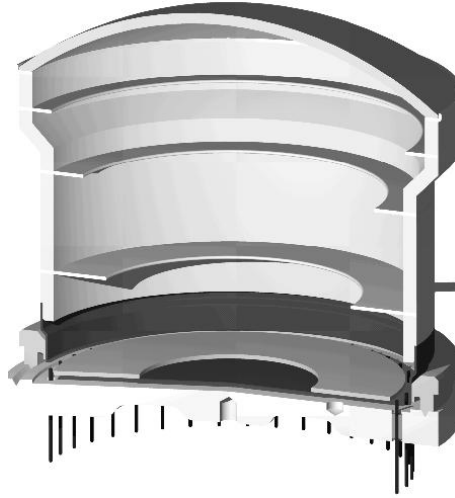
3D drawing of the ceramic 5-in. HPD.
